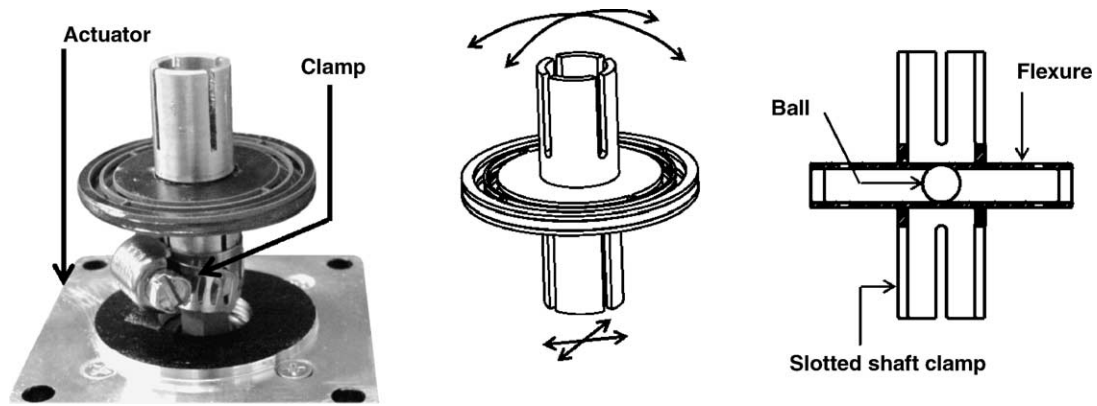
Actuator–shaft coupling. Left: coupling. Center: flexure degrees of freedom. Right: cross section of coupling.
